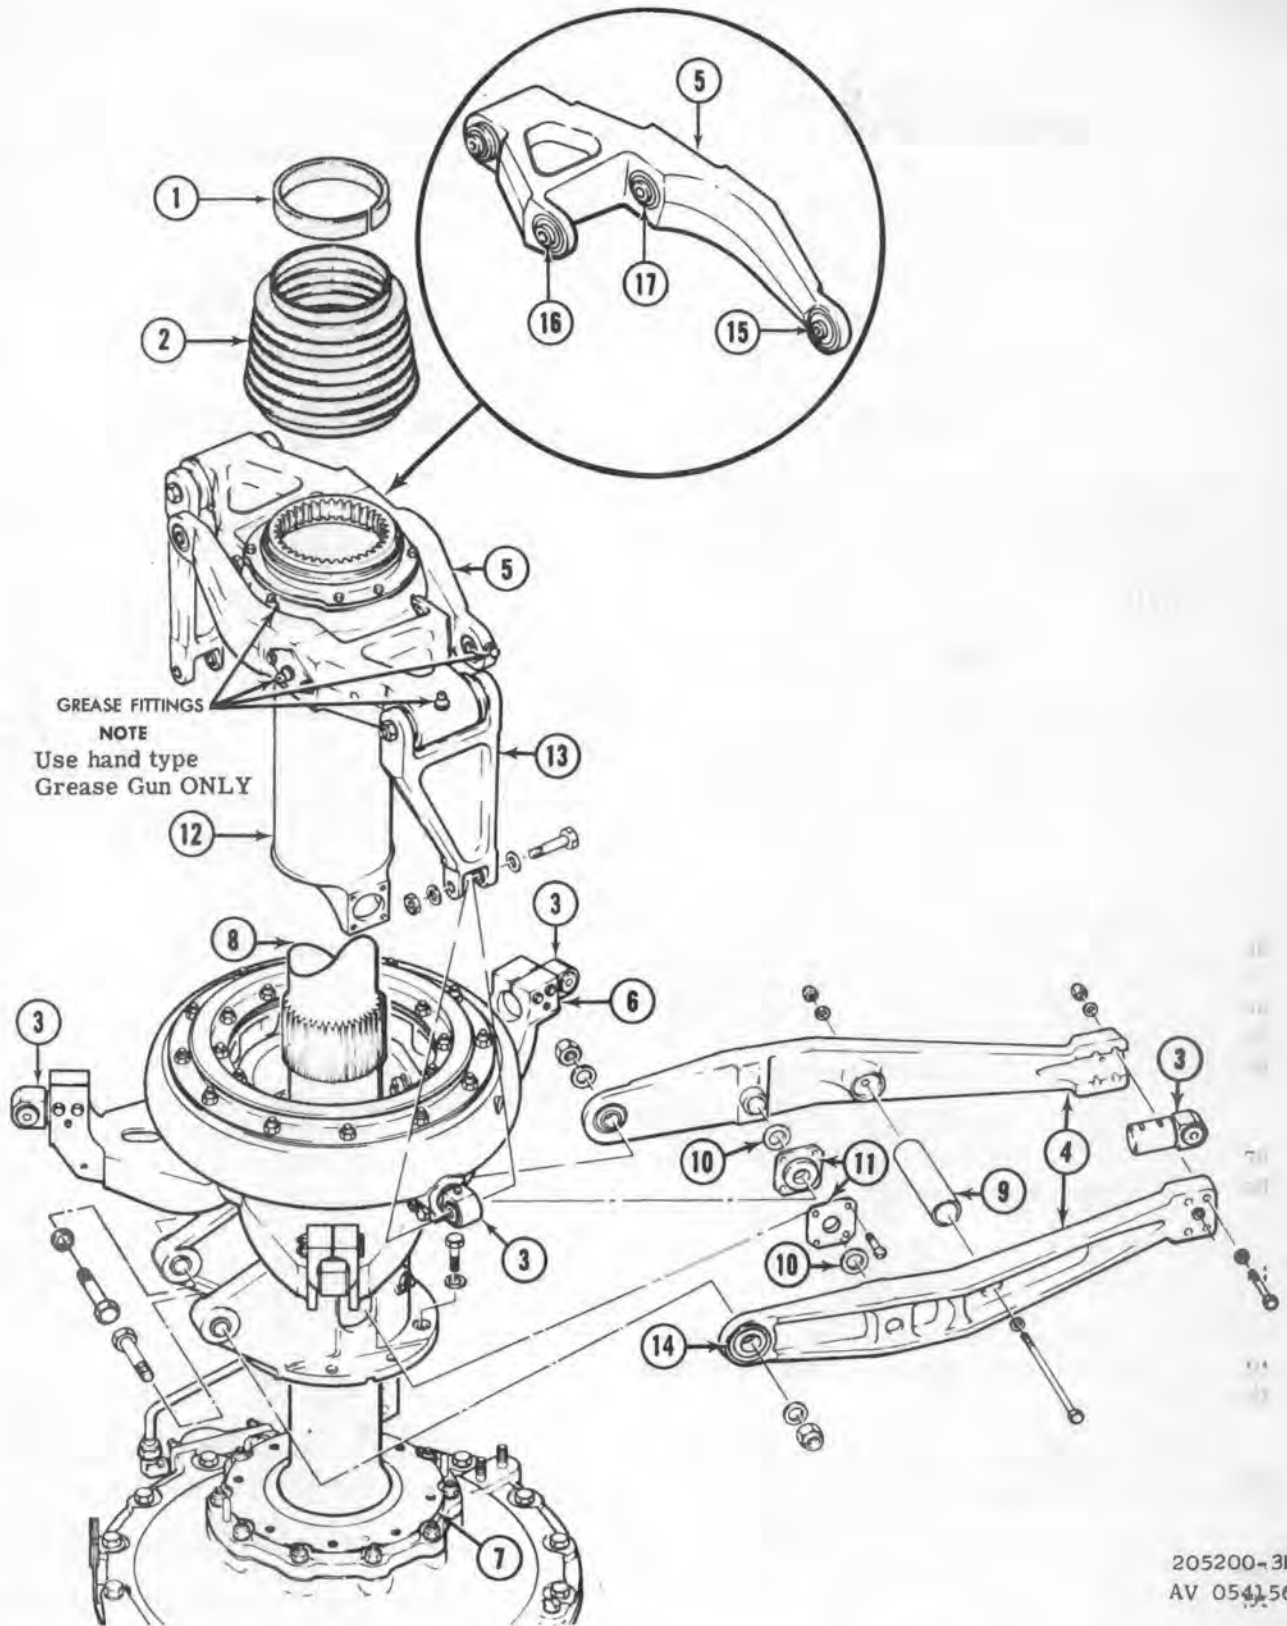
Swashplate and collective sleeve assembly (Sheet 1 of 2)
